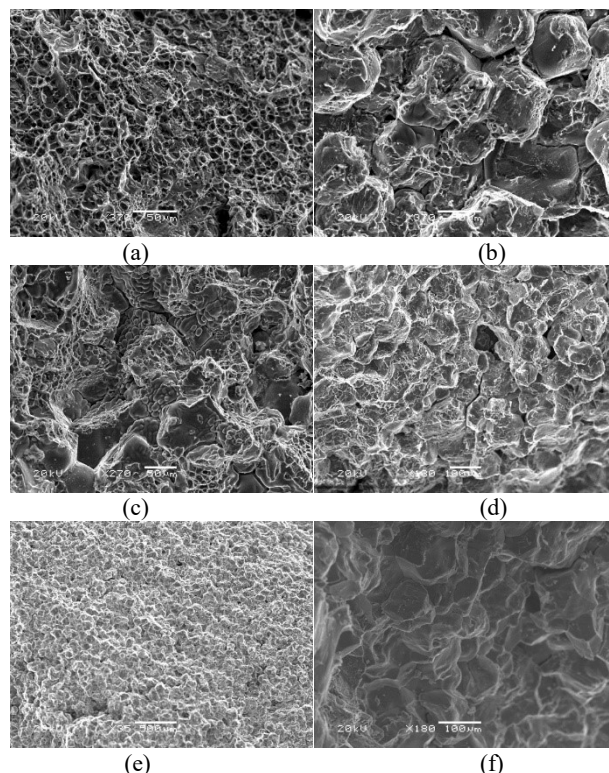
SEM images on the fracture surface of tensile samples. (a) ductile fracture surface; (b-c-d) mix fracture surface; (e-f) pore initiated, hot tear look-alike transgranular fracture surface
